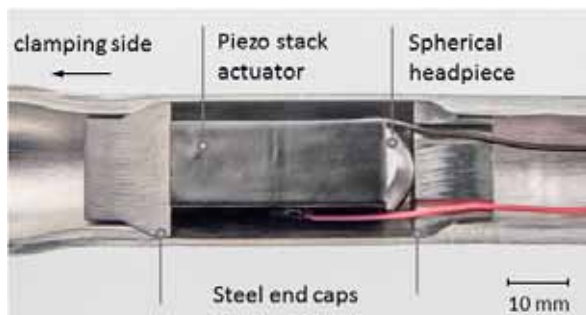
View cut of an integrated stack actuator with spherical headpiece
